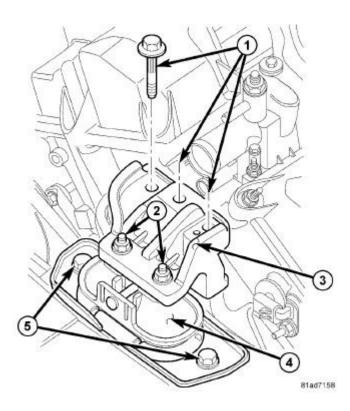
Removing/Installing Right Engine Mount (V6) Courtesy of CHRYSLER LLC
